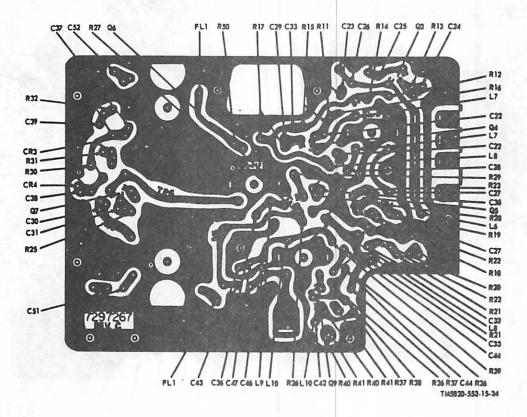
Component terminal locations, receiver assembly A4A7A1A1 (lower board).
